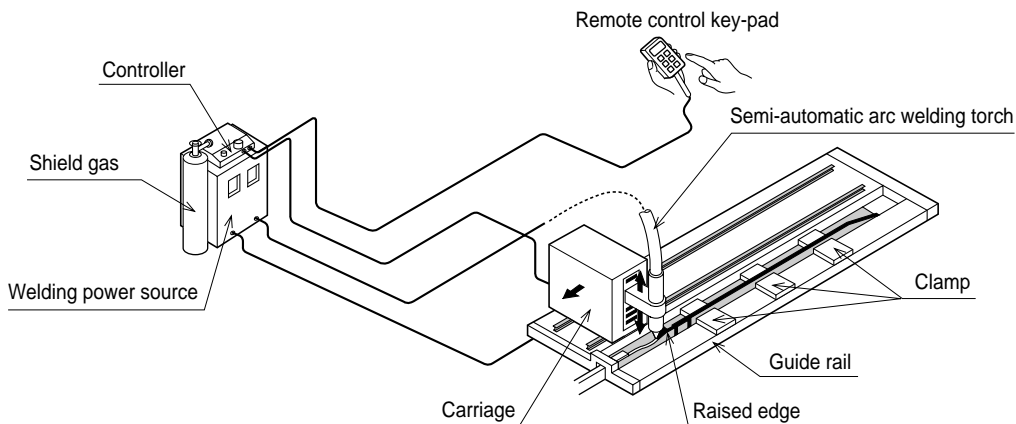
Automatic TIG welding robot with lightweight unit
